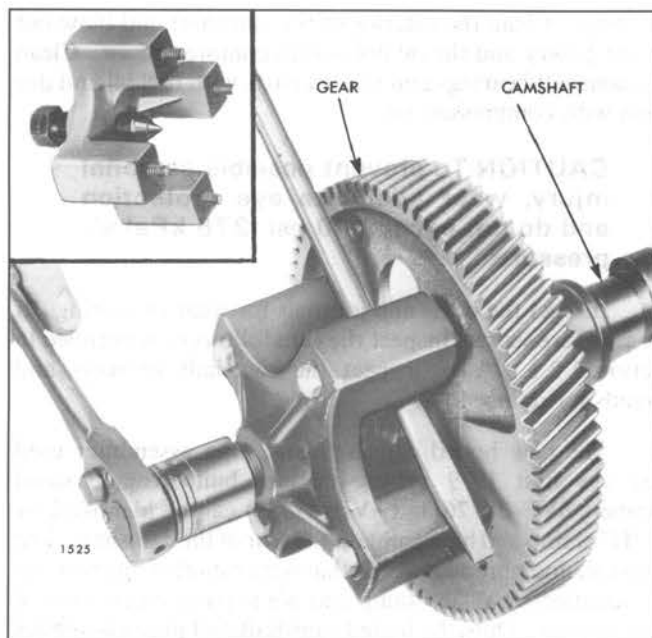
Removing Gear (Camshaft Gear Puller J 1902-01)
